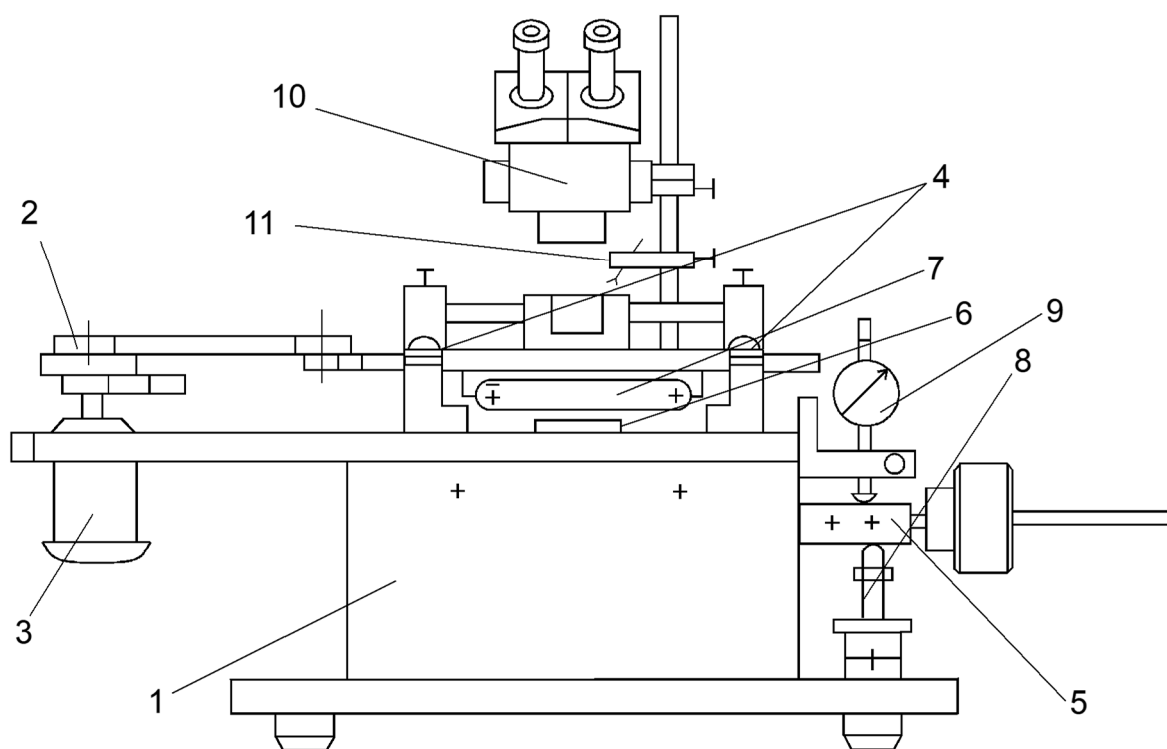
Schematic of a small-sized desktop machine for cutting thermoelectric material: 1 – bed; 2 – drive unit; 3 – electric motor; 4 – carriage fastening unit; 5 – mechanism for raising and lowering the table; 6 – material to be cut; 7 – cutting tool; 8 – system for regulation and control of cutting depth; 9 – indicator; 10 – microscope; 11 – coolant supply.
